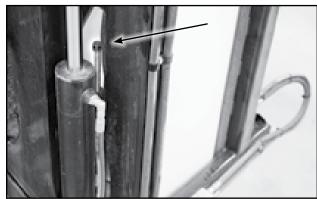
Tension Bolts on Folding Conveyor, CST-1500
